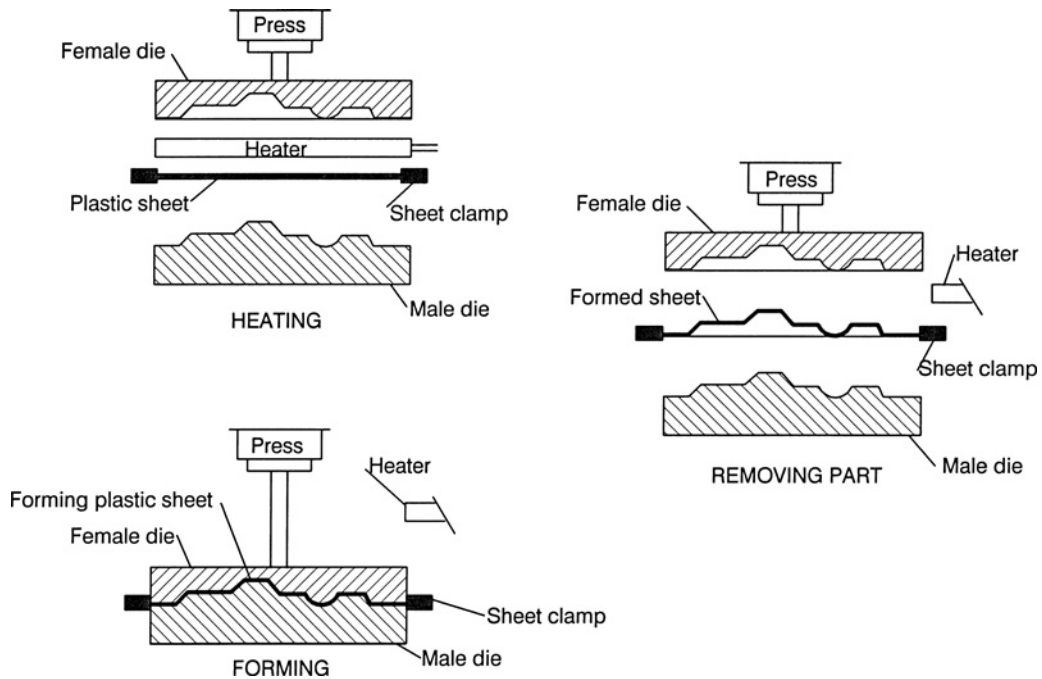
Forming in a matched metal die system. After heating, the sheet is formed by the application of mechanical pressure to the upper part of the mold.
